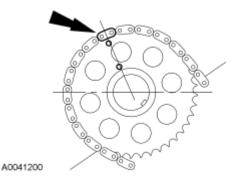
Aligning Copper (Marked) Link With Timing Mark On Crankshaft Sprocket Courtesy of FORD MOTOR CO.
